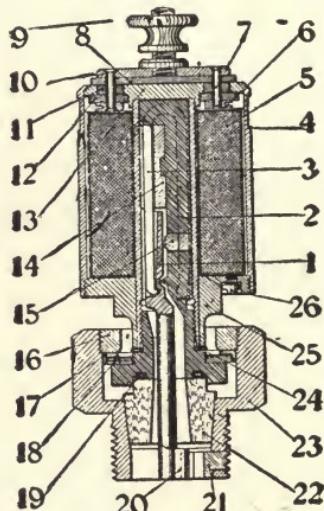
THE BOSCH MAGNETIC PLUG IN SECTION.
